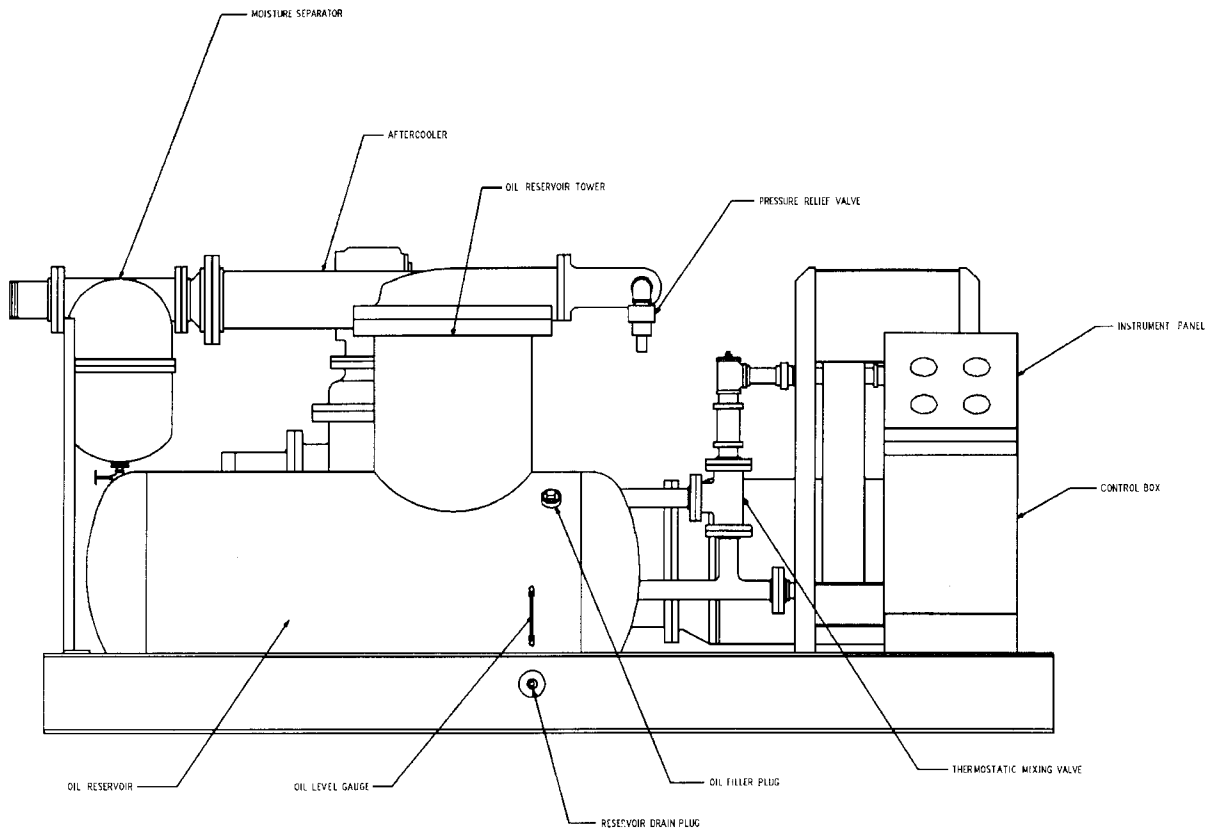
VIEW OF WATER COOLED UNIT WITH AFTERCOOLER (LESS ENCLOSURE) COMPRESSOR - RESERVOIR END
